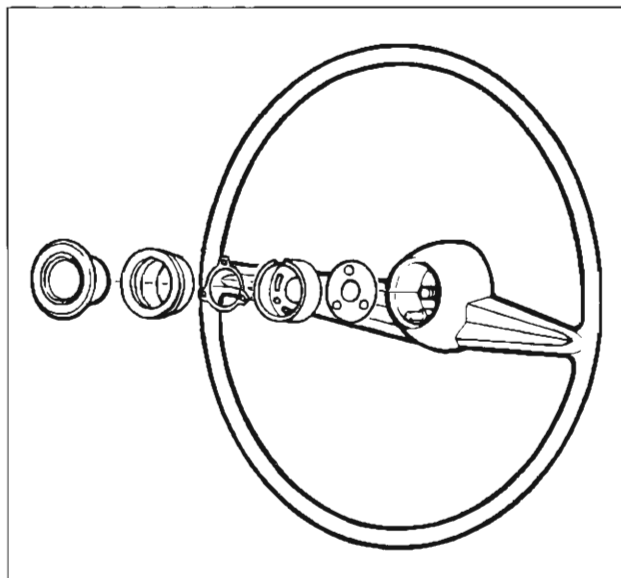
Horn Button Attachments (1100 and 1200 Series)
